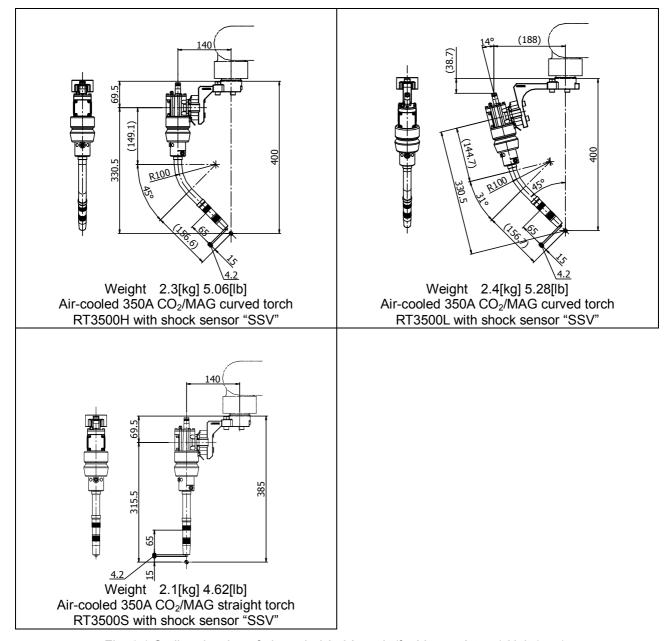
Outline drawing of air-cooled 350A torch (for V type, A type) Unit (mm)
